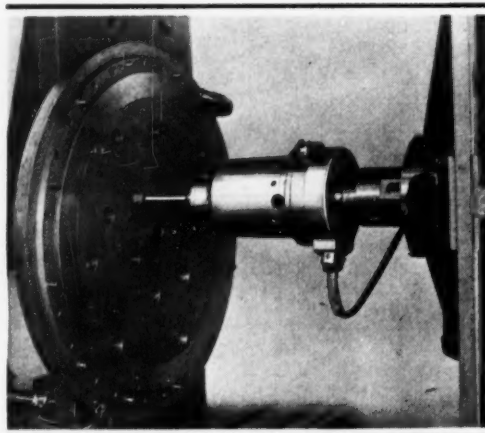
Olofson Precision Grinder Applied to a Horizontal Boring Machine
